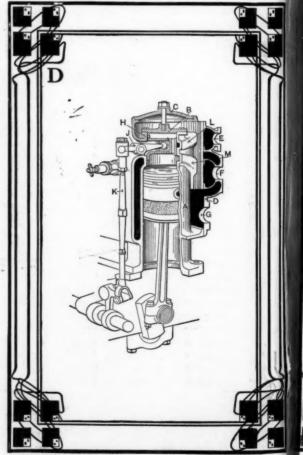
Fig. D-Showing the Reno Bois motor with part of the water acket removed, together with the valve operating mechanism.
